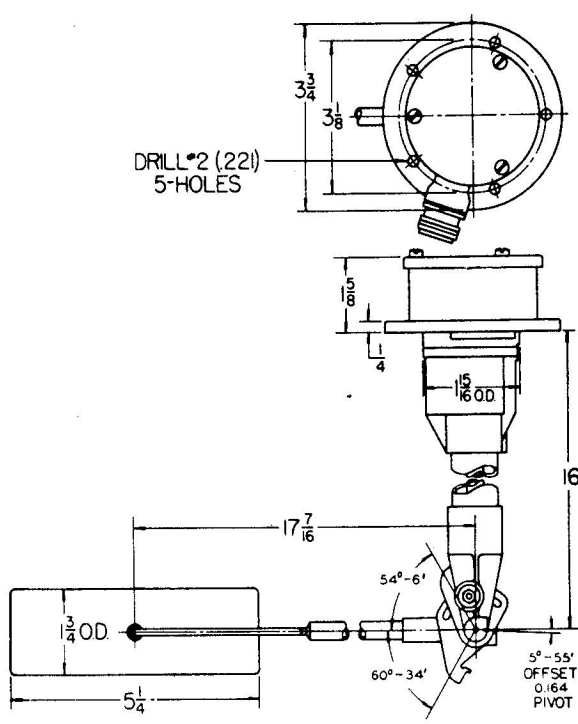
(Sheet 7 of 9 Sheets). General Dimensions
